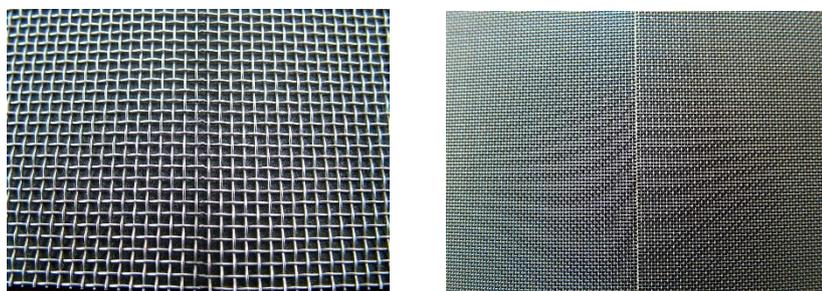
Plasma welded sieve joint (left) and Silver soldering sieve joint (right).
